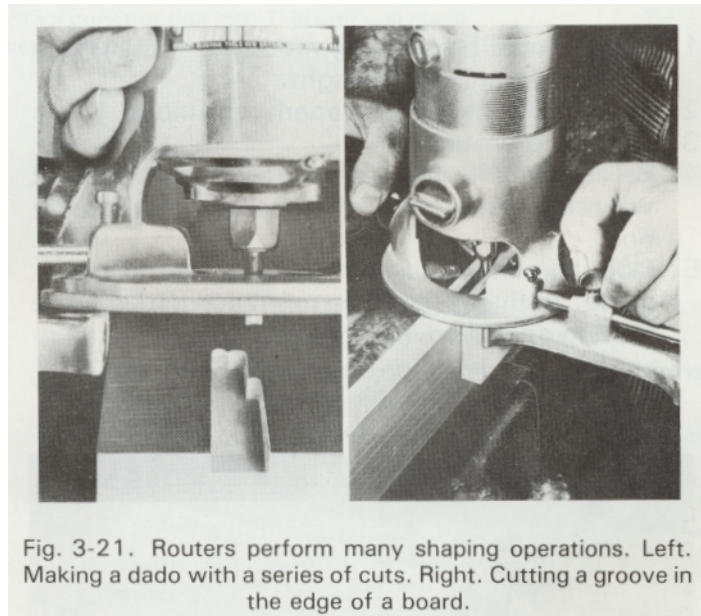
Routers perform many shaping operations. Left. Making a dado with a series of cuts. Right. Cutting a groove in the edge of a board.
